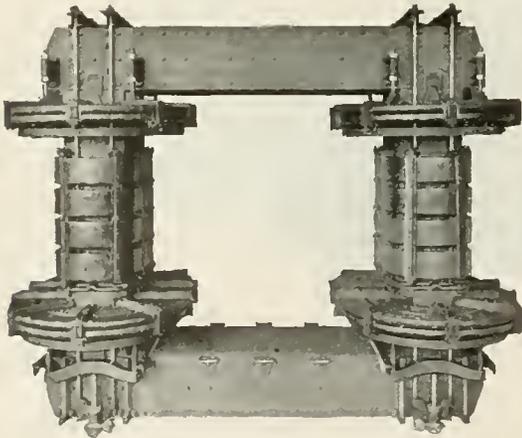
Arrangement of Core and Coils for 20-Ton, Two-Ring Induction Furnace
